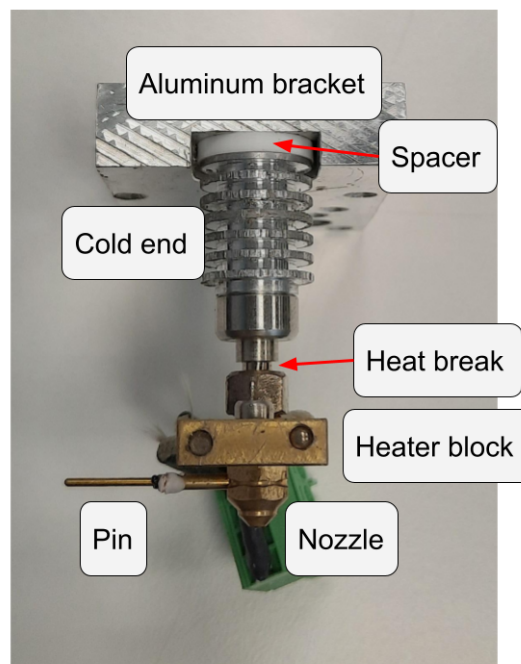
Front view of the basic pressure monitoring set-up. The heater block must be aligned such that its cables point backwards. A spacer is used to align the pin to the left.
